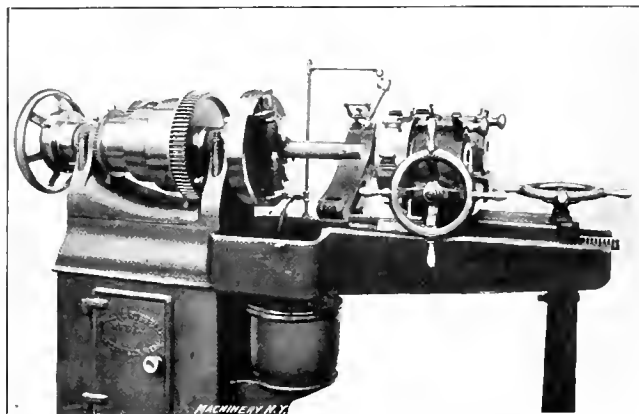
Combined Bolt Cutter, Nut Tapper, Pipe Threader and Cutting-off Machine
